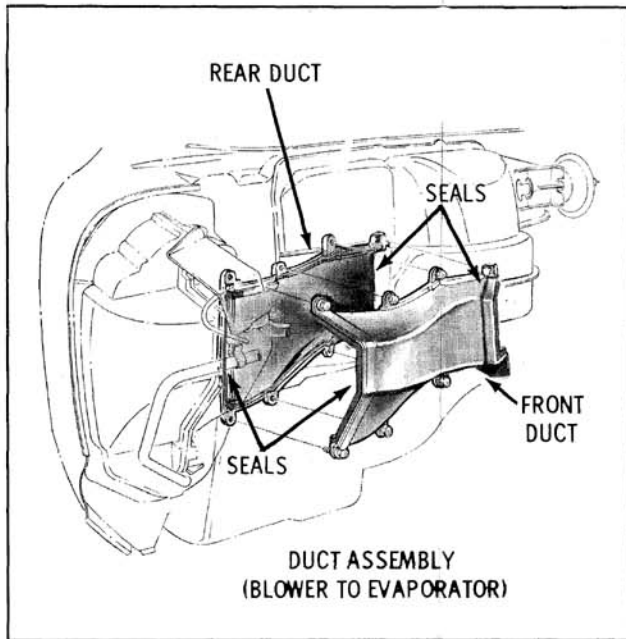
Duct Assembly (Blower to Evaporator)
